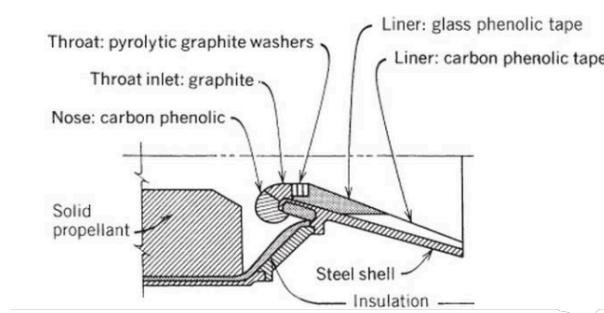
Ablative cooling on a solid rocket motor's nozzle and thrust chamber
